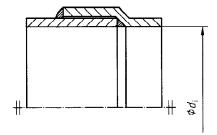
Socket extrusion weld (inner weld for size DN 800 or larger)
